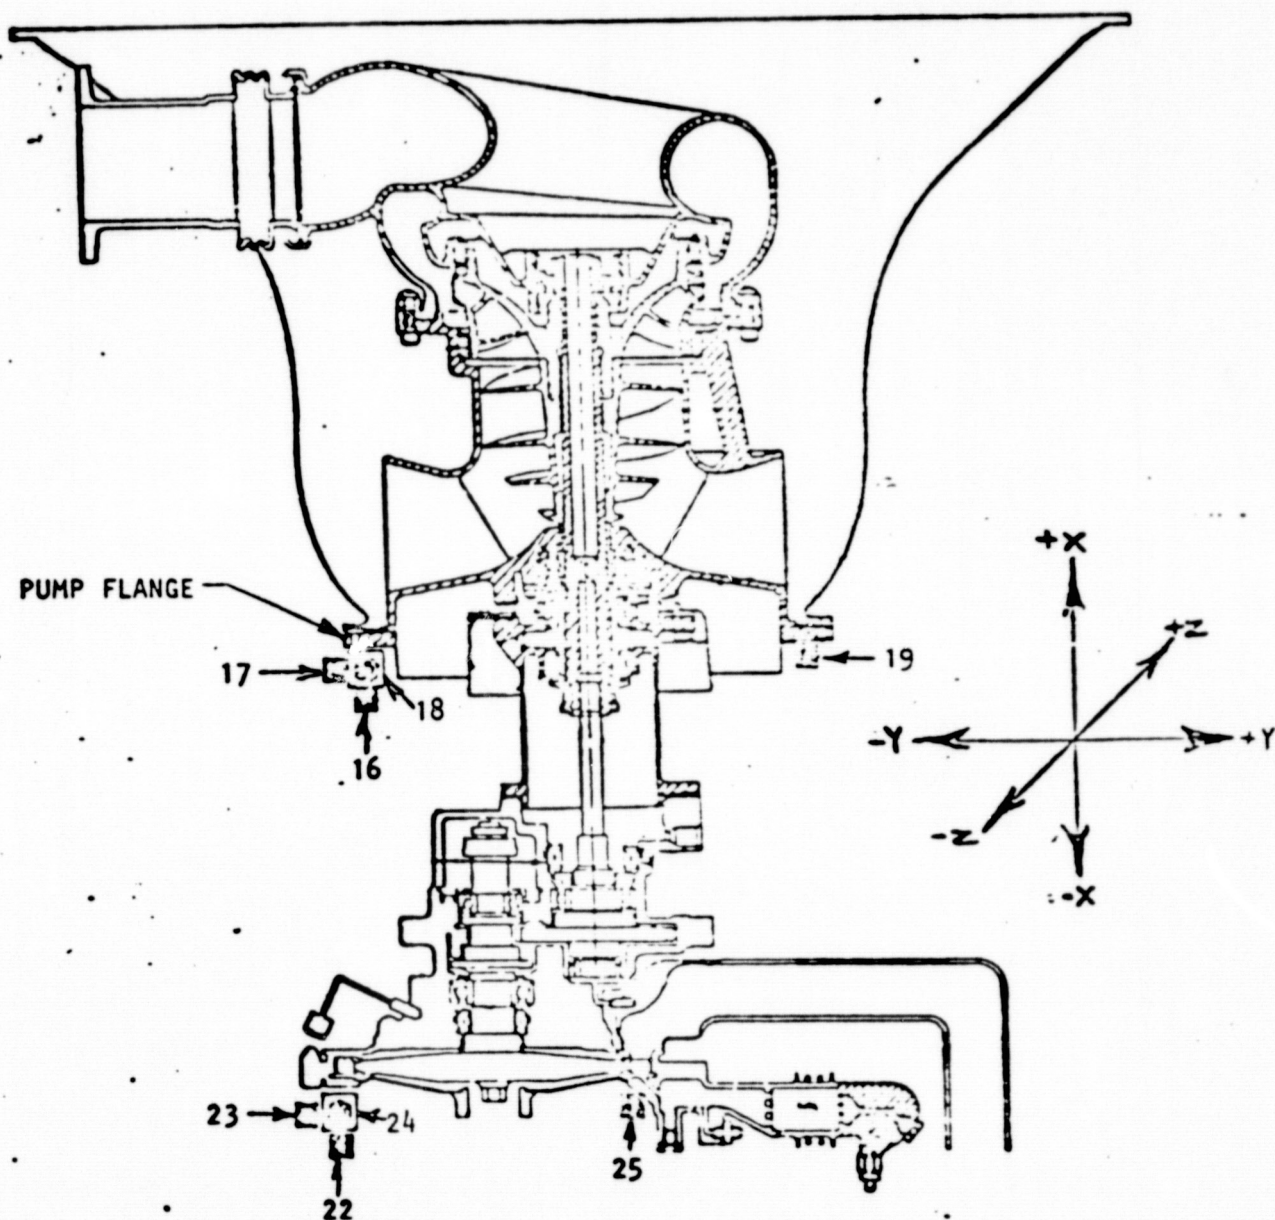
GENERAL VIEW SHOWING LOCATION OF THE PUMP FLANGE AND TURBINE WHEEL ACCELEROMETERS
